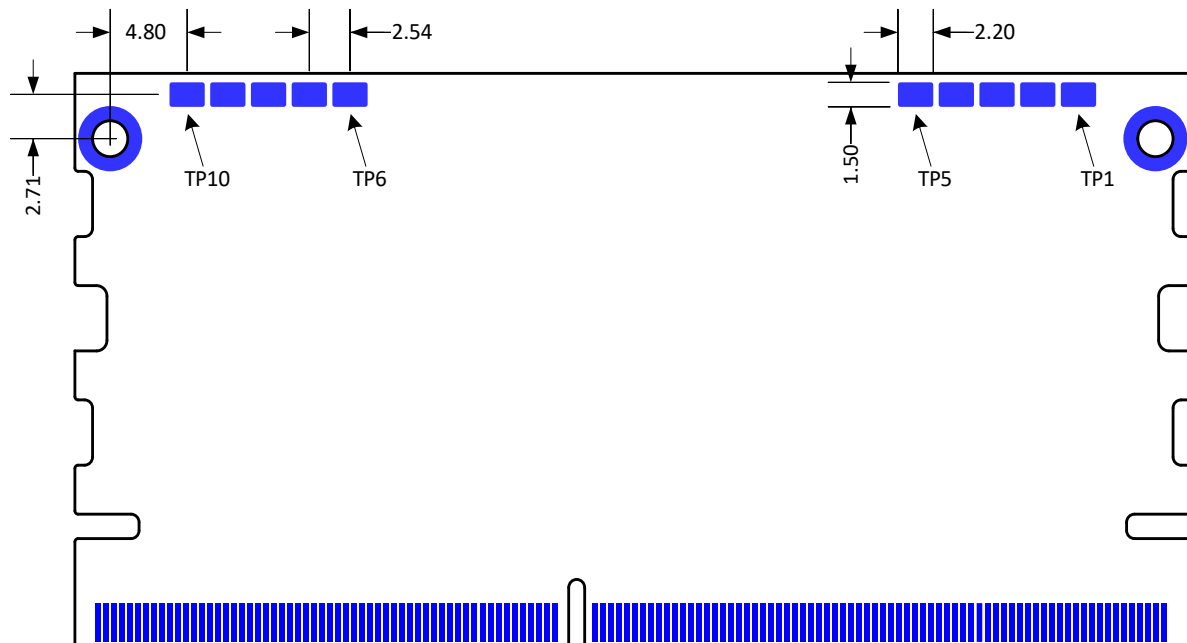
Bottom side of module illustrating test points and relative positions (bottom view)
